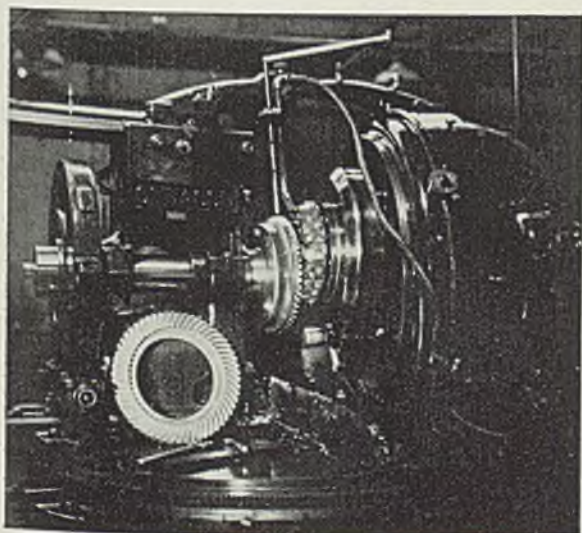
Gear generating unit which can be arranged to cut gears with either straight or spiral teeth
